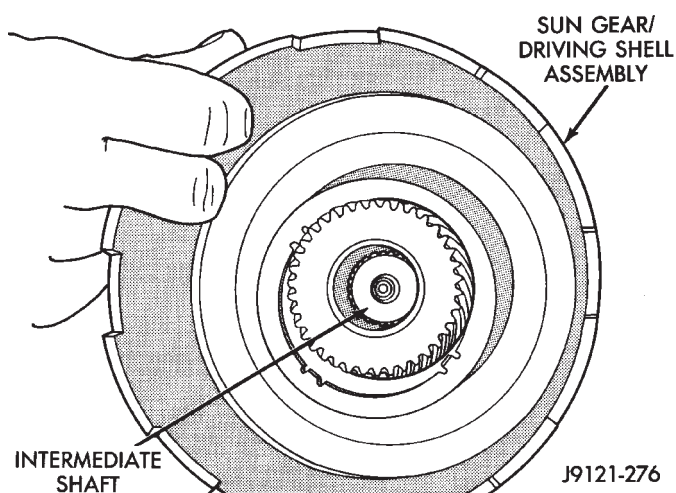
Installing Assembled Sun Gear And Driving Shell On Intermediate Shaft
